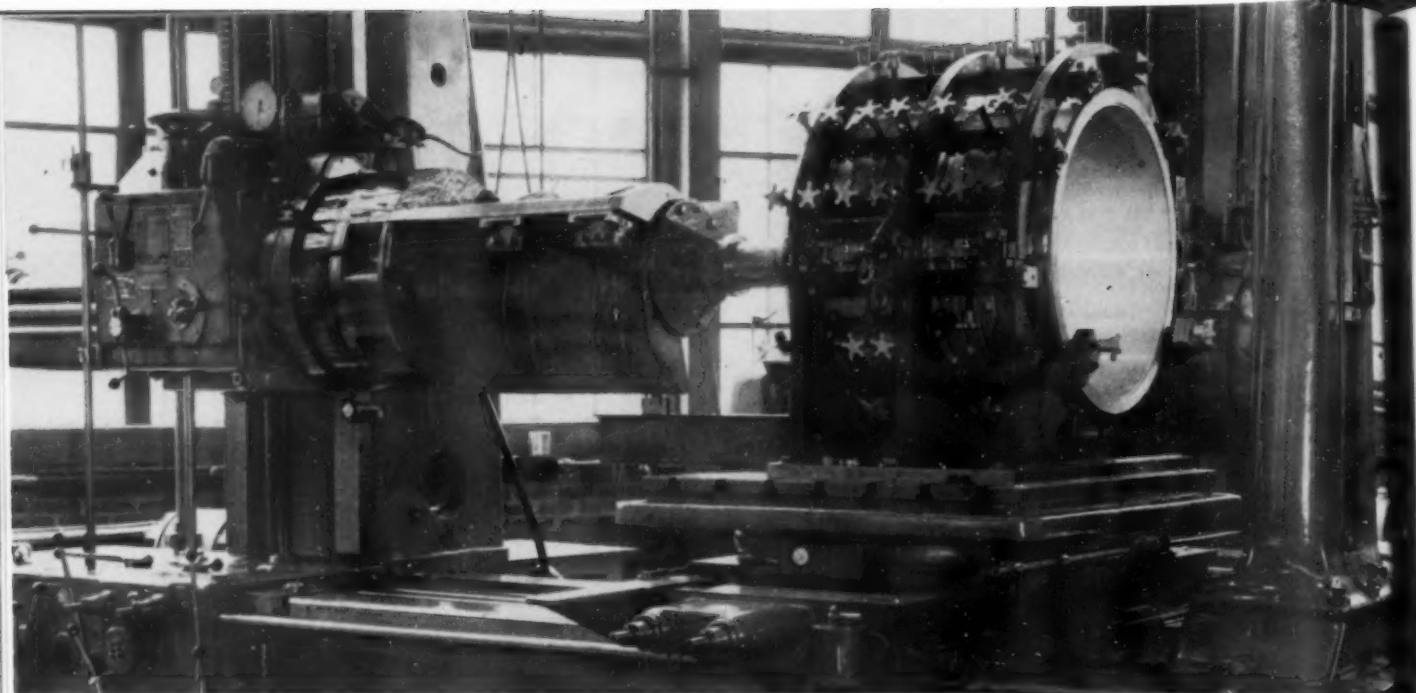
Multiple-tool cathead on horizontal boring mill. The table holding the fixture and workpiece will be traversed toward the machine column so that the work will envelop the cathead. The manually operated fixture has since been replaced by a multiple operating hydraulic fixture.
